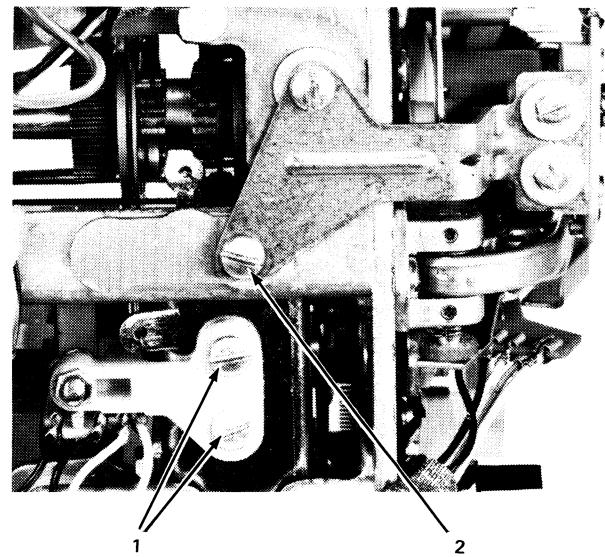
Index Magnet Assembly Removal (Bottom of Printer)
